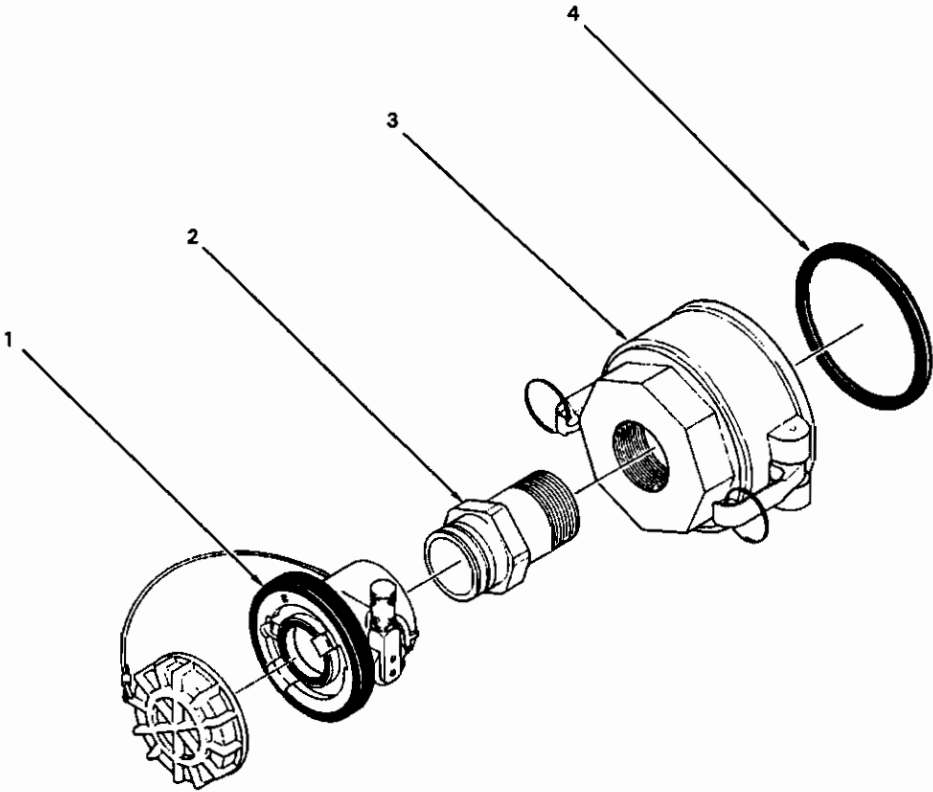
2-Inch Unisex to 4-Inch Female Camlock Adapter
